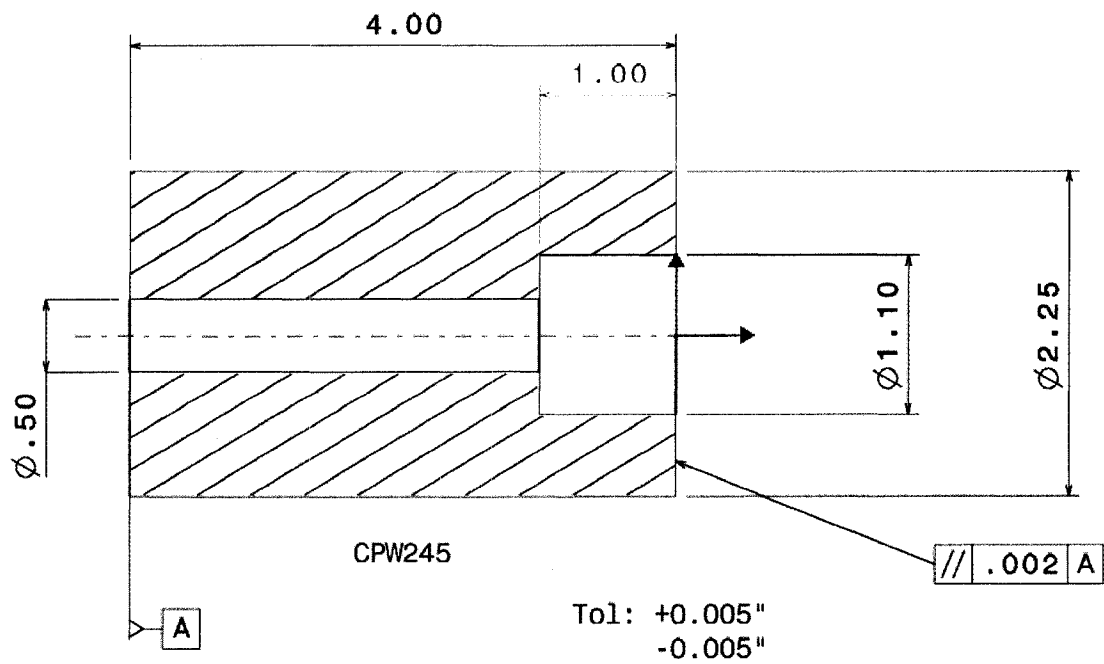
CPW245 test piece configuration for friction welding
